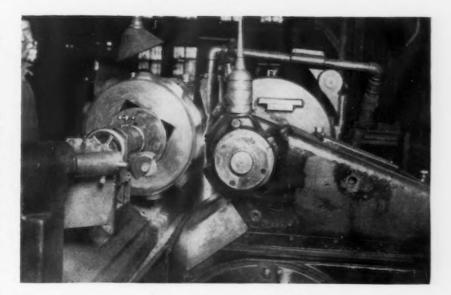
Grinding the outside diameter of 24-in. manganese steel shipper shaft pinion.
